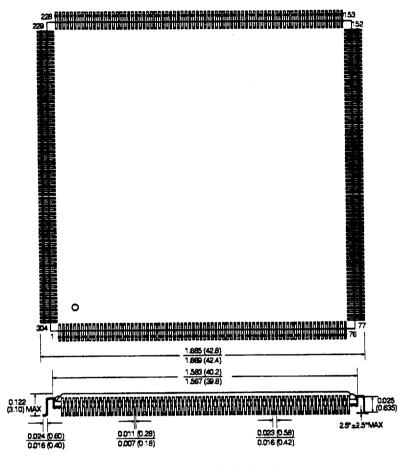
Top View, heat sink not shown. Drawing not to scale in(mm)
